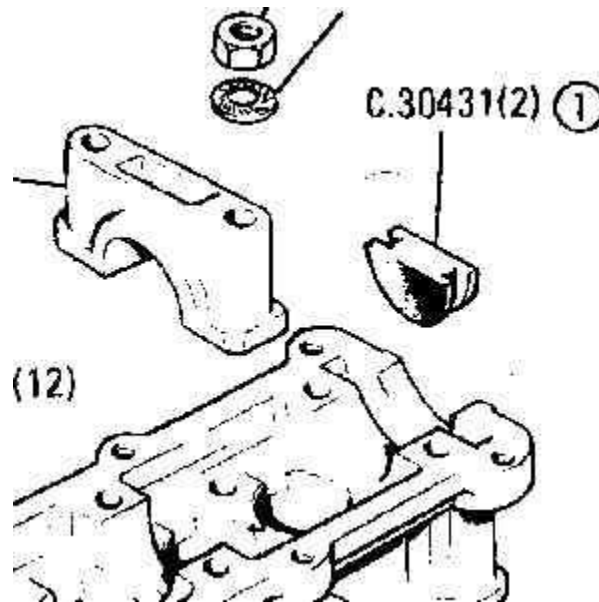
Cam cover, gasket, and half-moon seal (from parts book)
